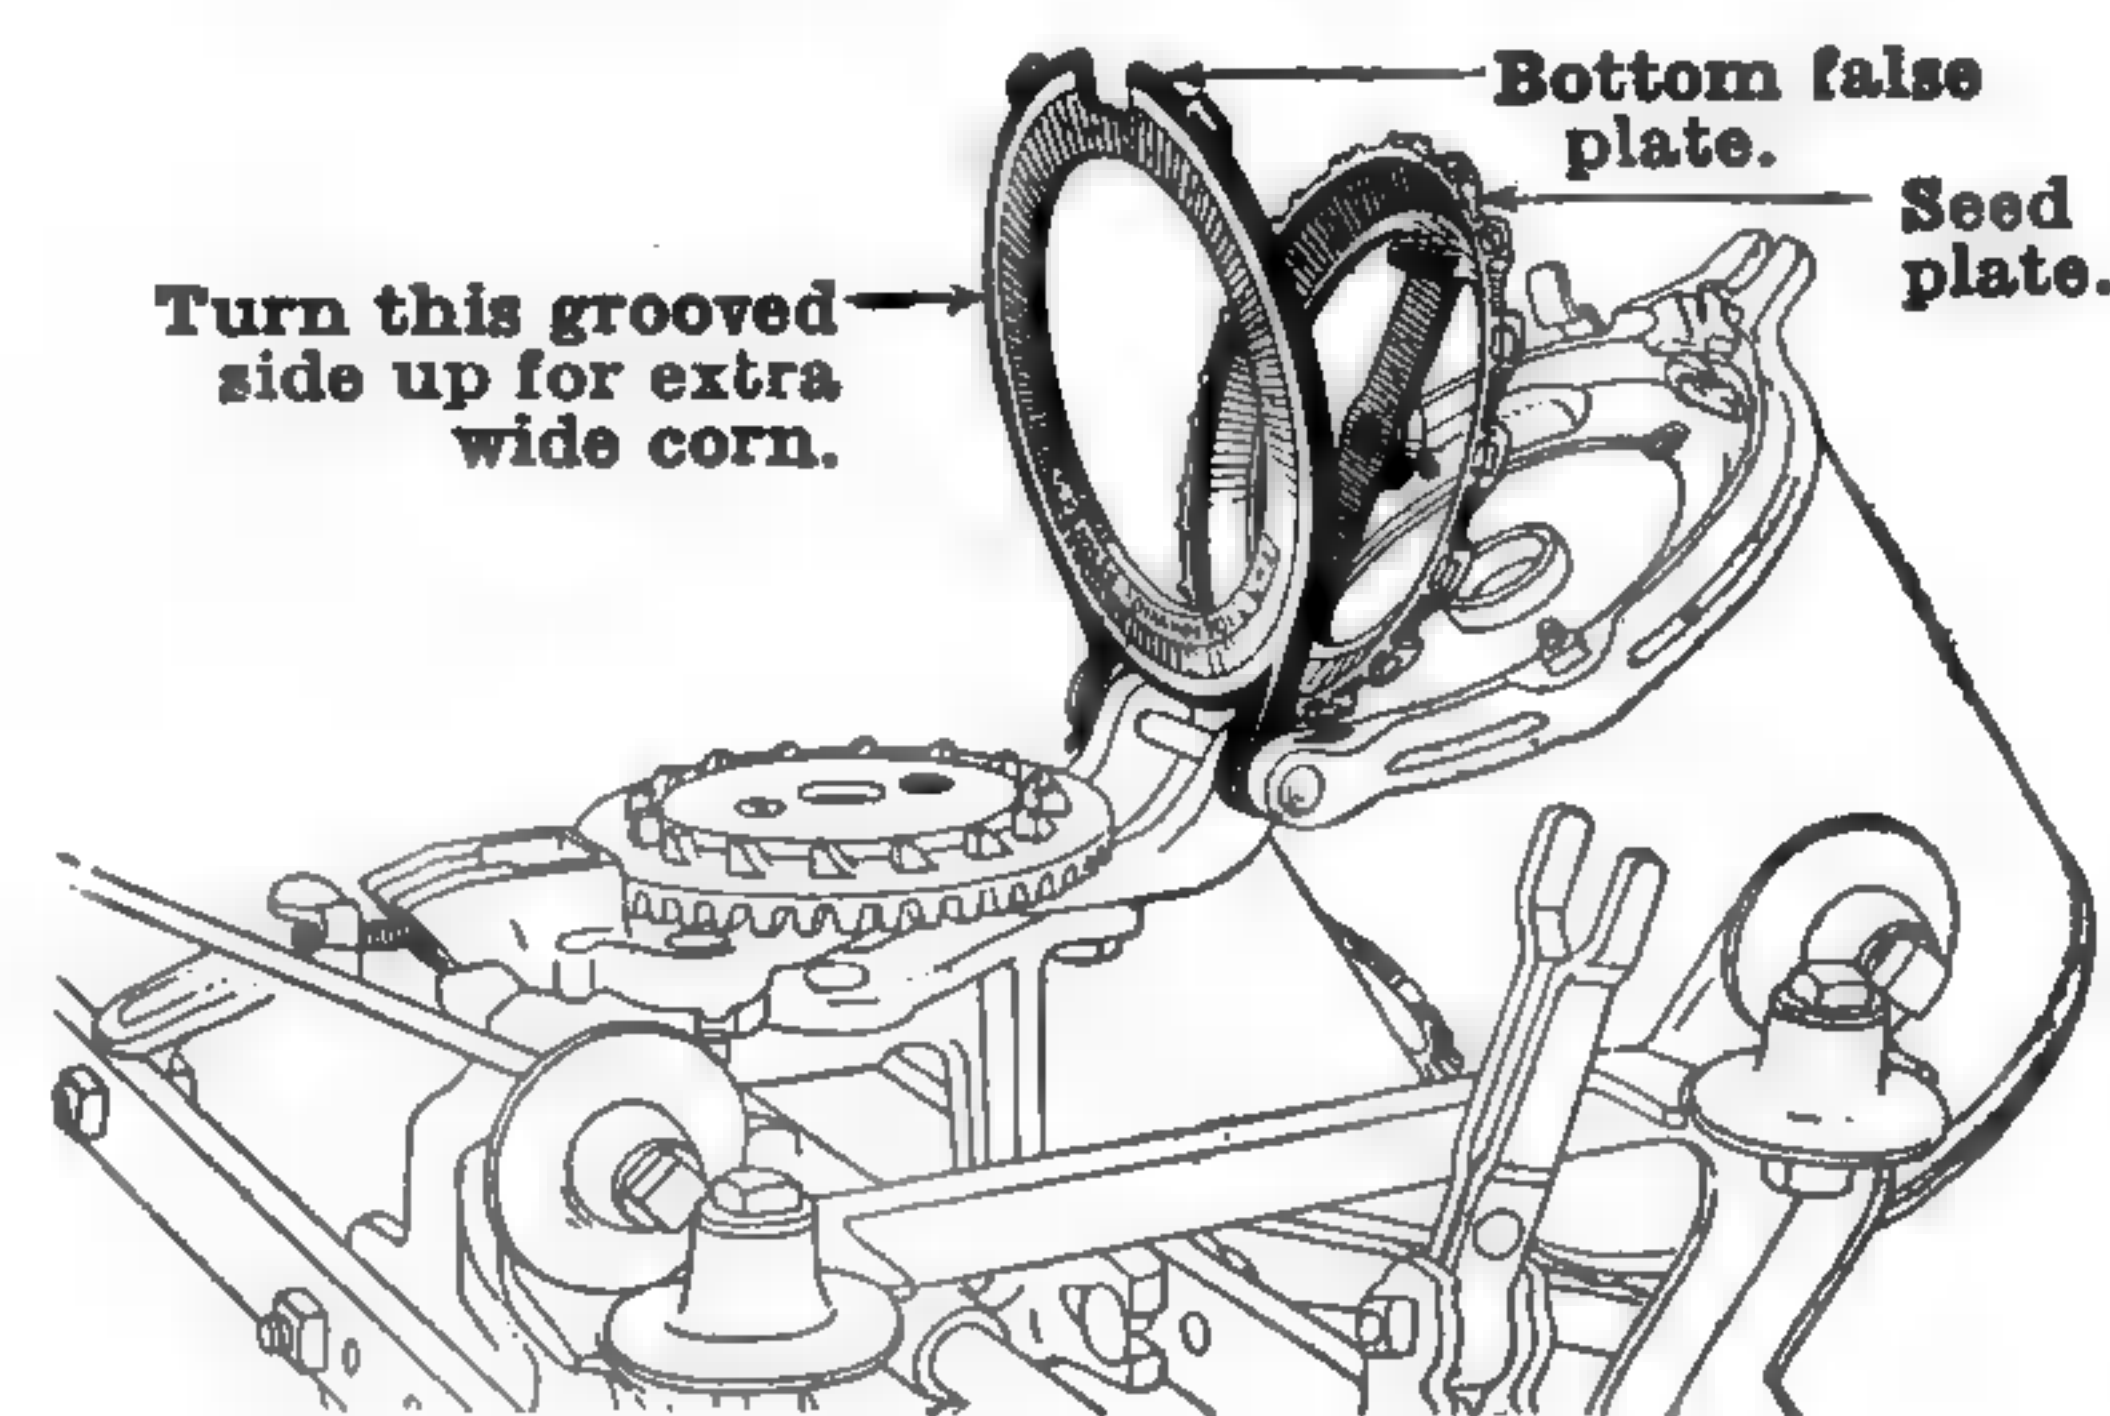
Assembly of the hopper, seed plate, and bottom false plate showing how seed plates are removed by tipping hopper forward.
